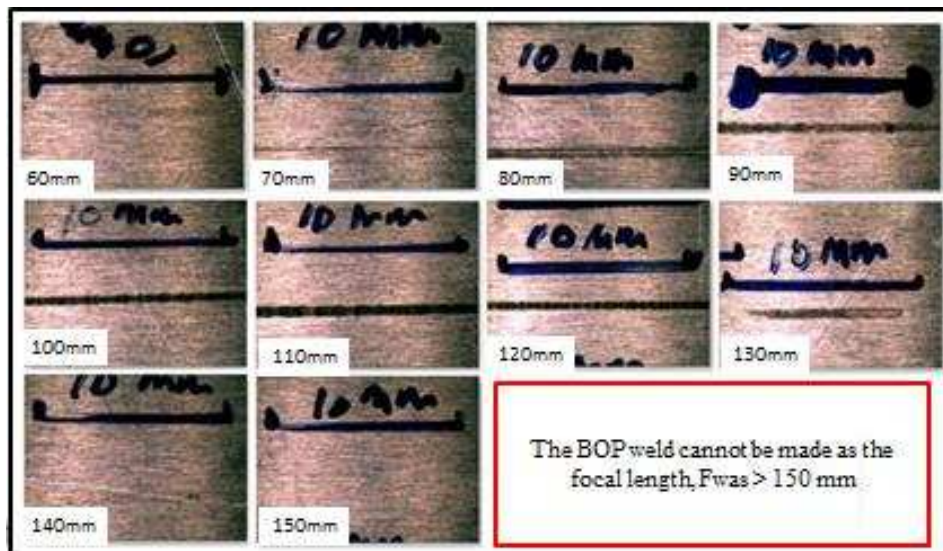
Weld line produced on sample surface (CW) (5x magnification).
